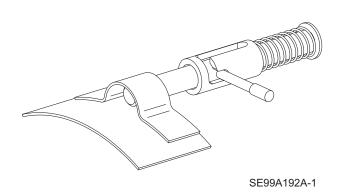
LOCK TAB TYPE STEERING LOCK DISENGAGED
